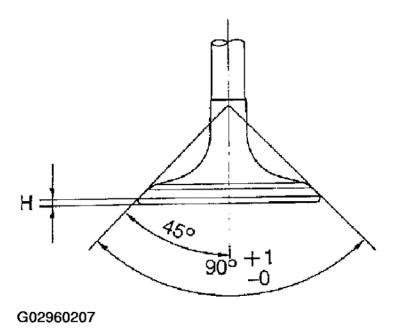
Inspecting Flange & Stem Of Valve Courtesy of SUBARU OF AMERICA, INC.
